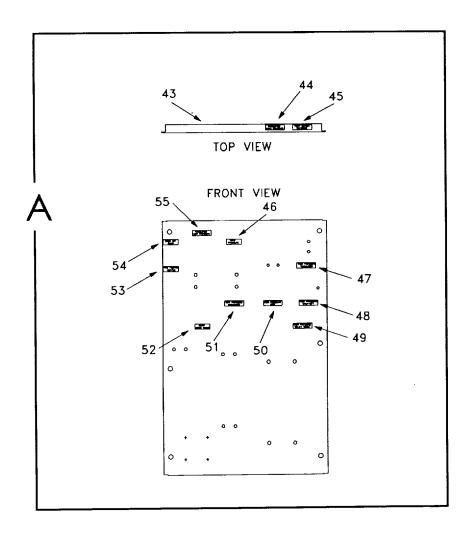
BOOSTER PANEL ASSEMBLY (PA004) (2 of 4)
